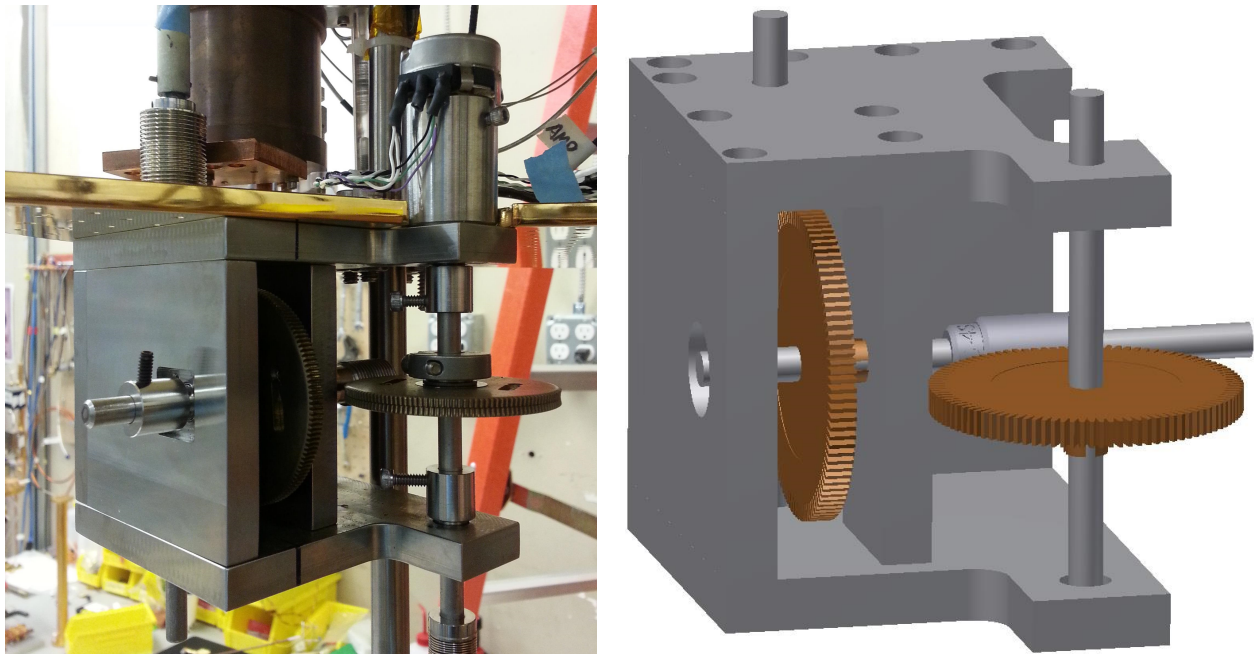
Tuning rod gear box. At left is a picture of the gear box installed in the insert, while a CAD model of the box is shown at right. Two circular gears are used along with a worm gear to provide a high gear reduction of 19,600:1, as well as strongly damp backlash of the G10 rods driving the gears. A potentiometer³ at the top of the gear box measures the location of the tuning rod driven by that box. A circulator⁴ is used to ensure that no unwanted power travels back into the cavity.
